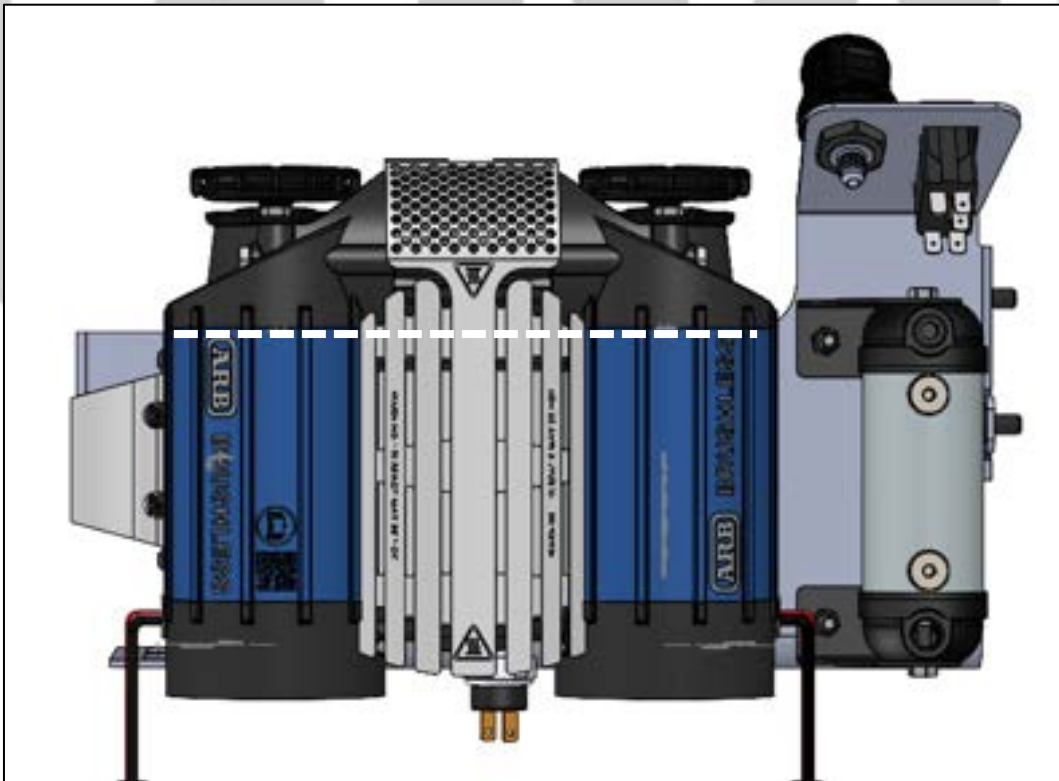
Brushless Twin Compressor bracket pre-assembly rear view
